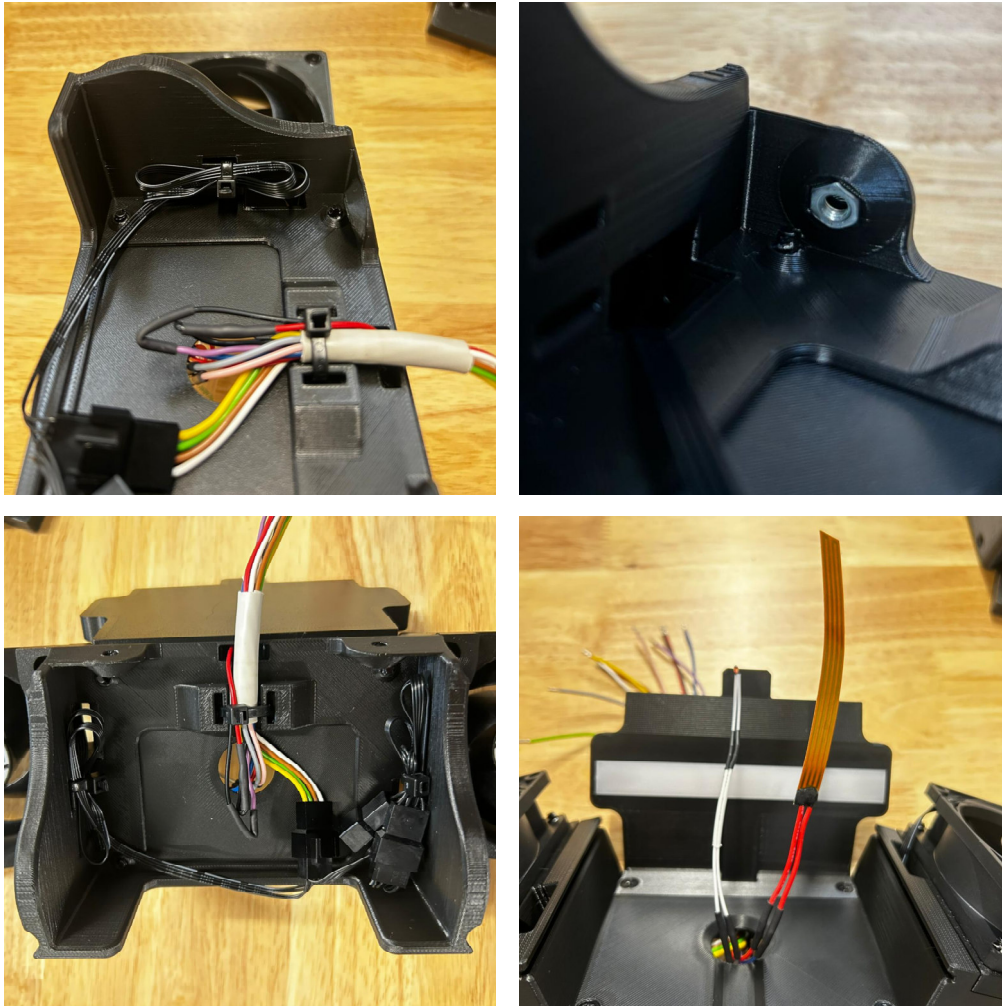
Associated installation photos for Step 2 – Pre-assemble fan/light carrier.
